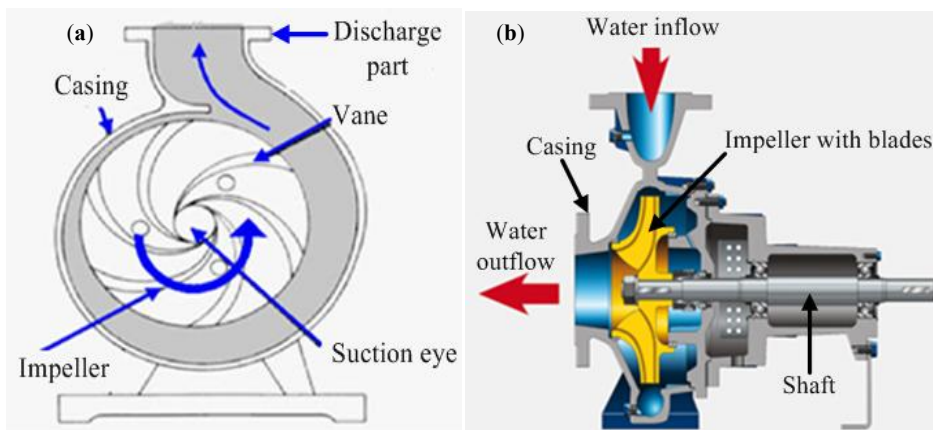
Principle operation of pump. (a) sectional view of pump showing main parts (Chaurette, 2005). (b) sectional view of pump in reverse mode showing the direction of water flow and shaft connected to impeller (Orchard, 2009)
